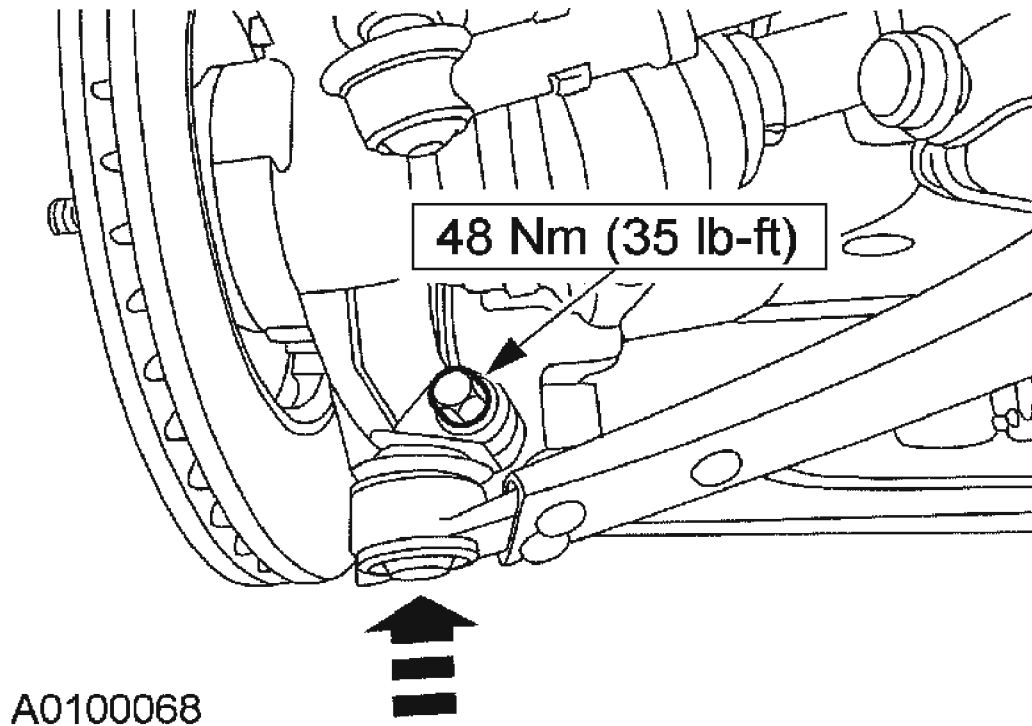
Tightening Lower Arm Rear Inboard Nut
